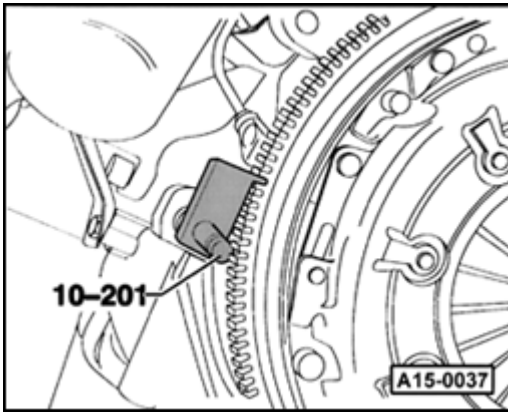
Reversing Position Of Counterhold 10-201 To Loosen/Tighten Bolts
